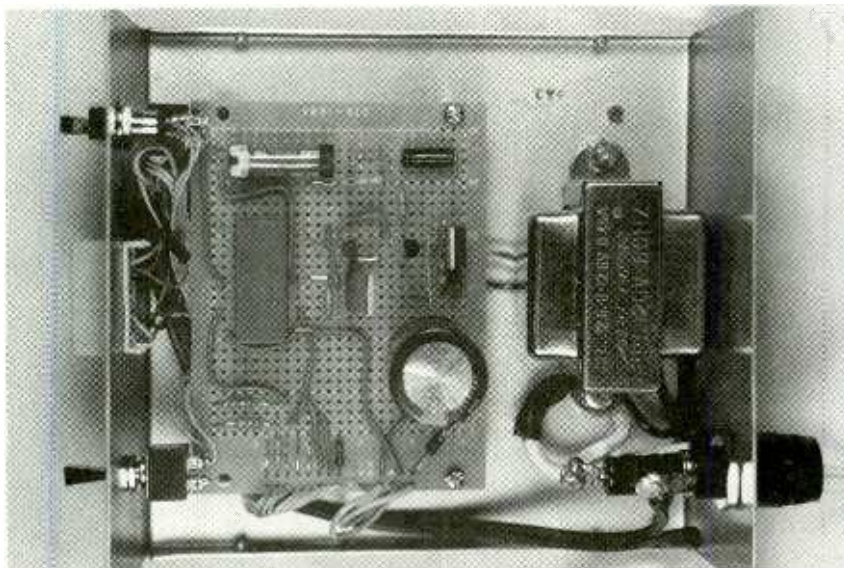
THE FINISHED BOARD can be mounted in a metal case. Jacks J1 and J2, switches S1 and S2, and LED1 are mounted on the front panel.
